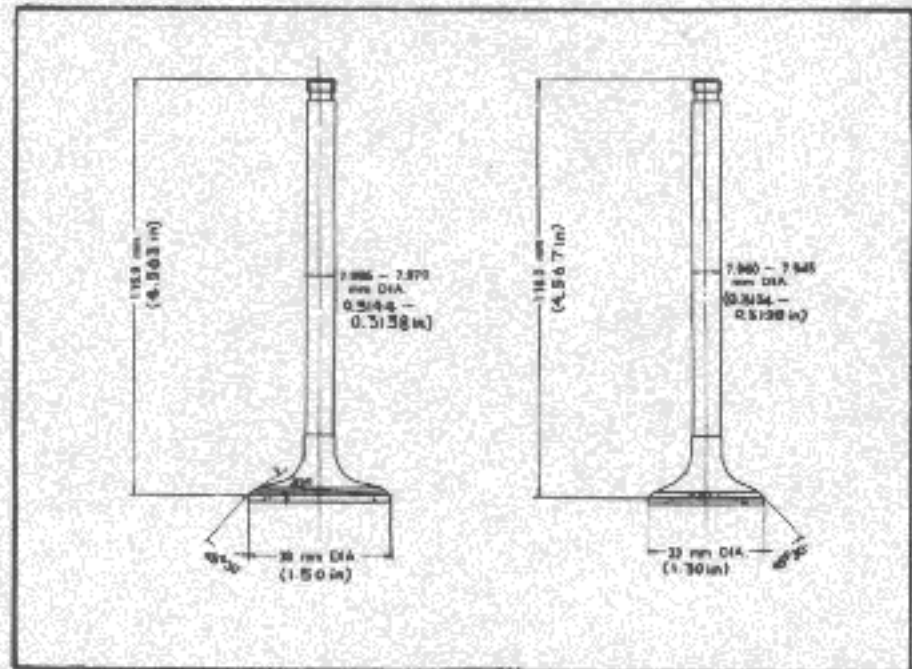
Valves for L13 and L16 (Single carb.) engine
